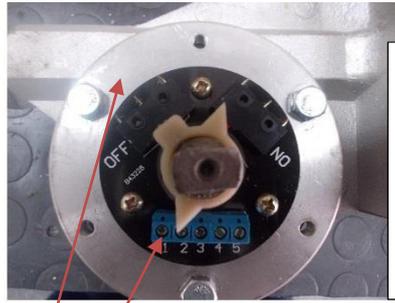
explanation: water weigh hopper discharge switch- 2x1 mm2 cross-section cable is used. The cables are connected to the 3 and 5 terminals on the switch.
